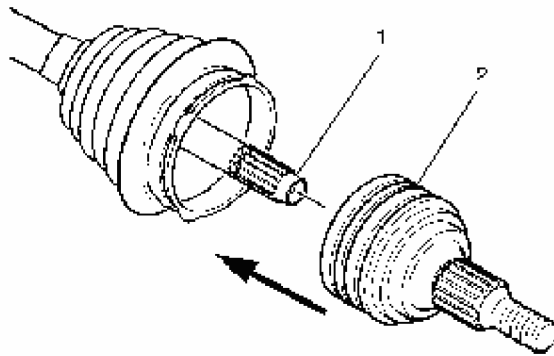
View Of CV Joint Inner Race Facing Halfshaft Bar
